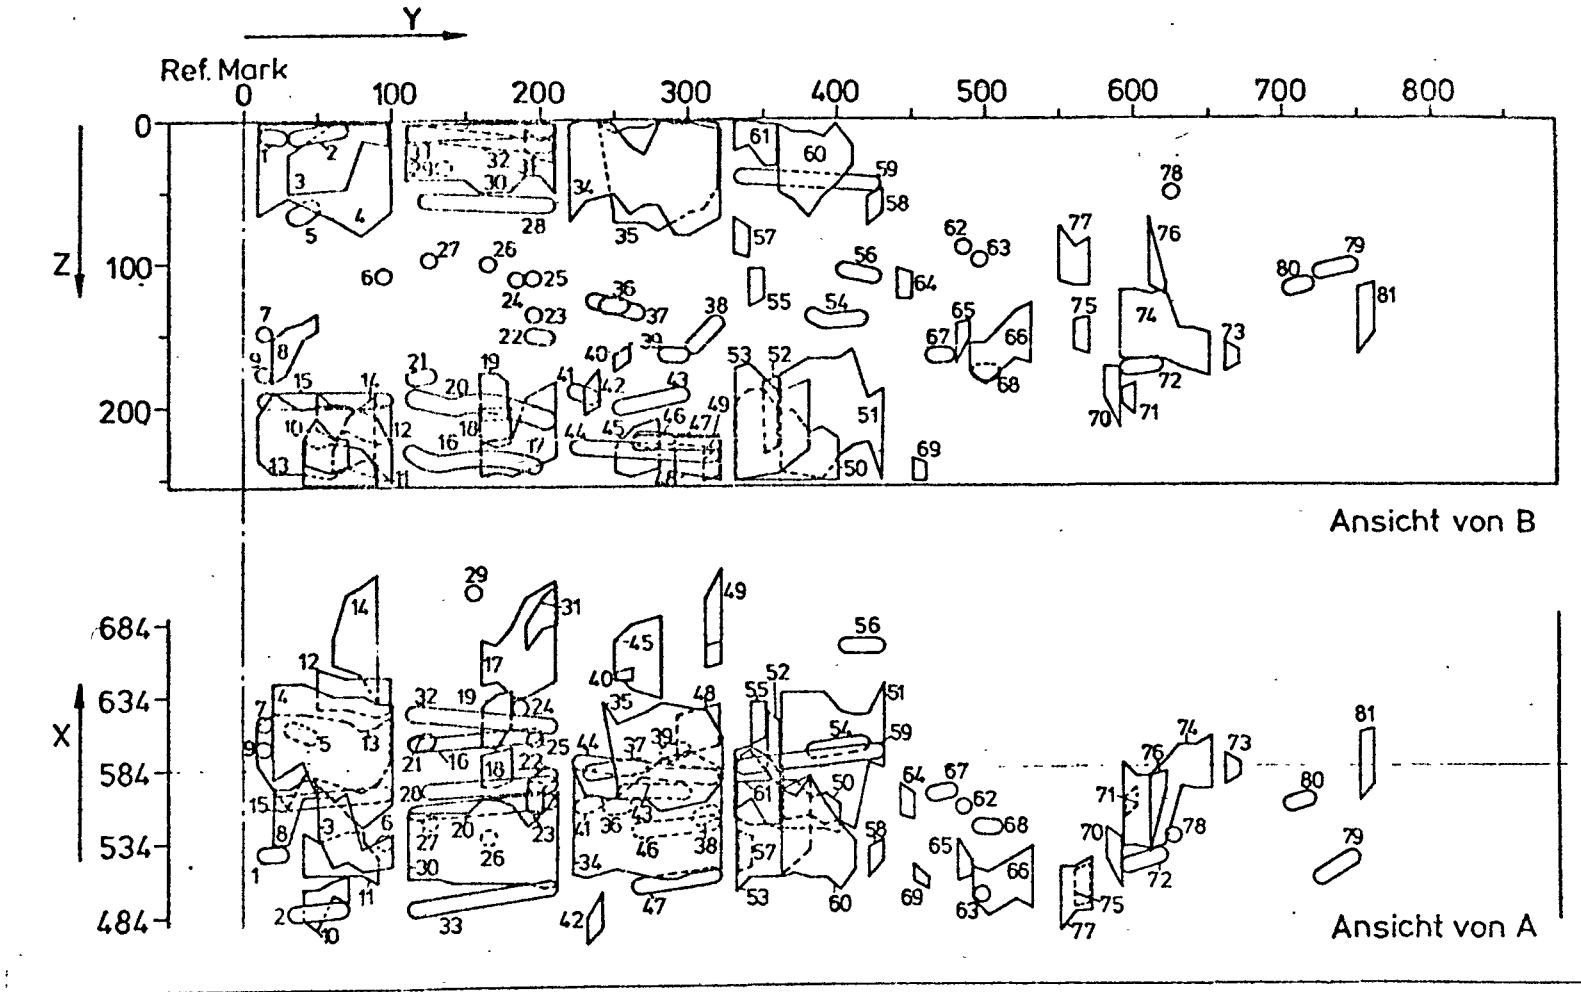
Fault-Position-Plan of the Testspecimen 50-52
